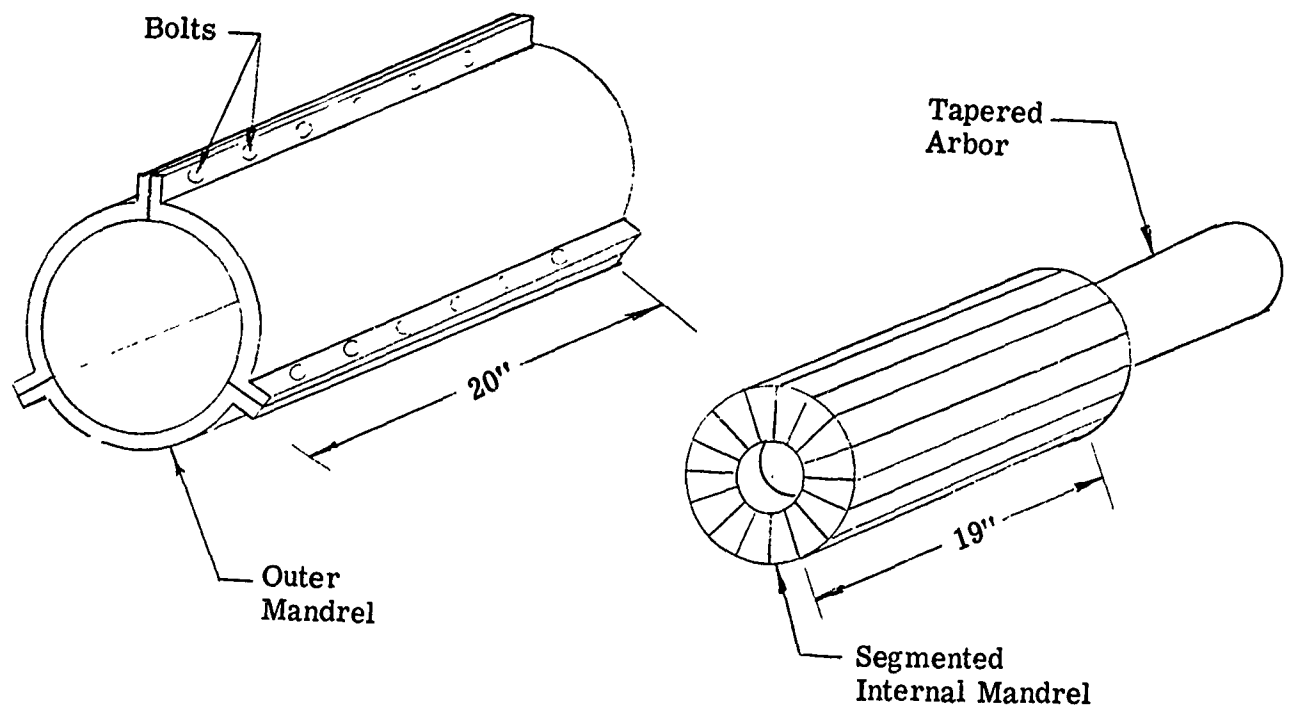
Outer and Internal Tooling Mandrels -Outer Cylinder
